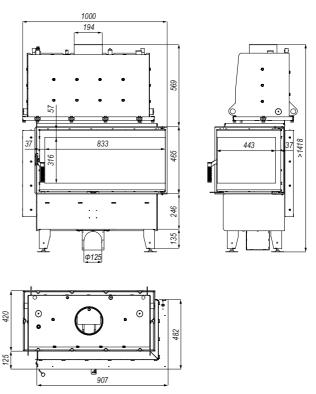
Projections with dimensions of DEFRO HOME RIVA ME fireplace insert.
